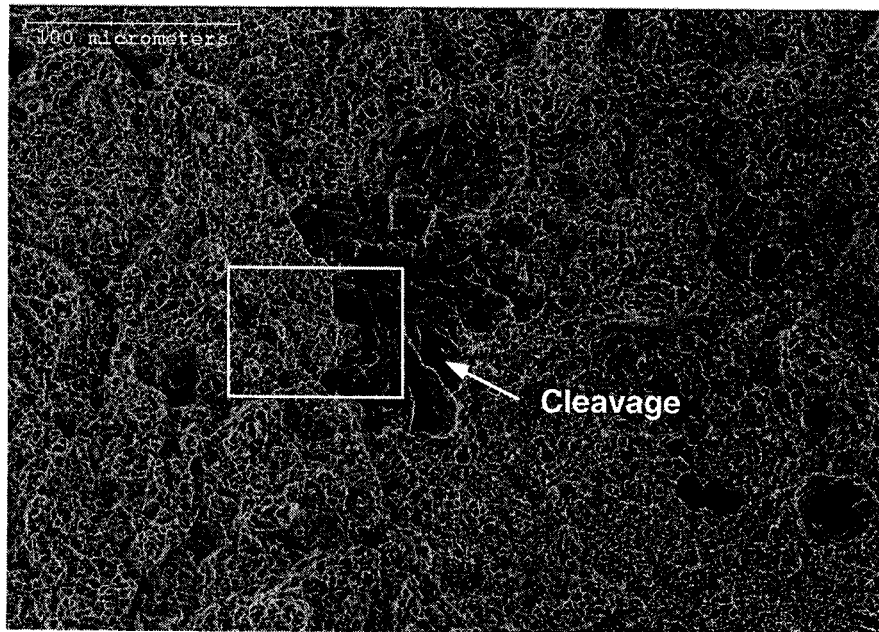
Fracture Surface of Test Specimen T2-3
